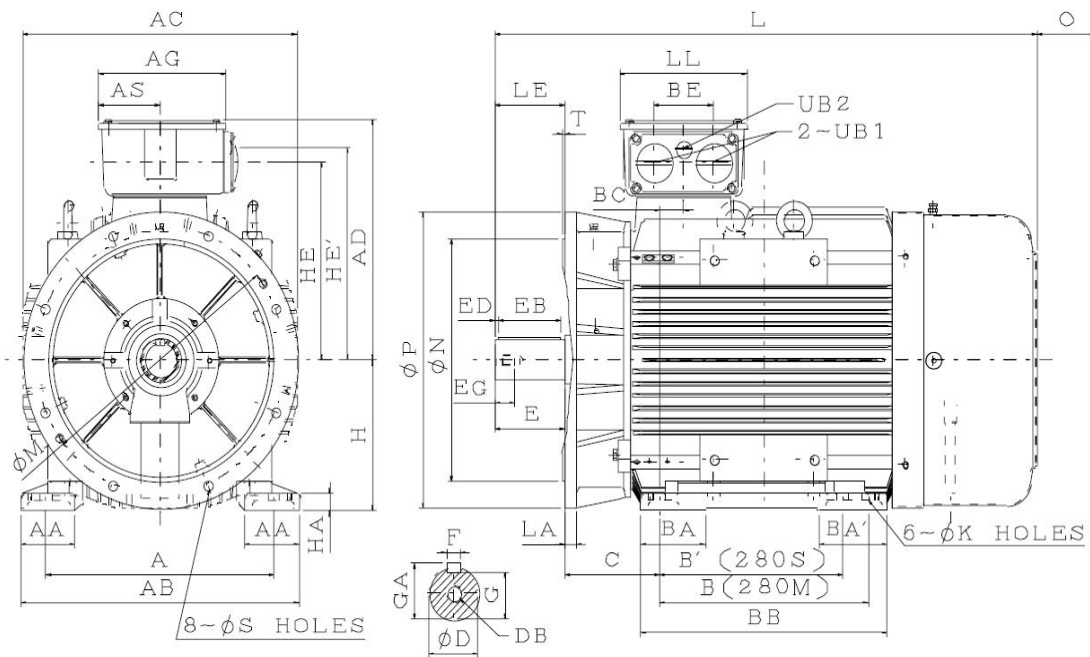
Outline drawing of cast iron design, mounting B35; frame size 280
